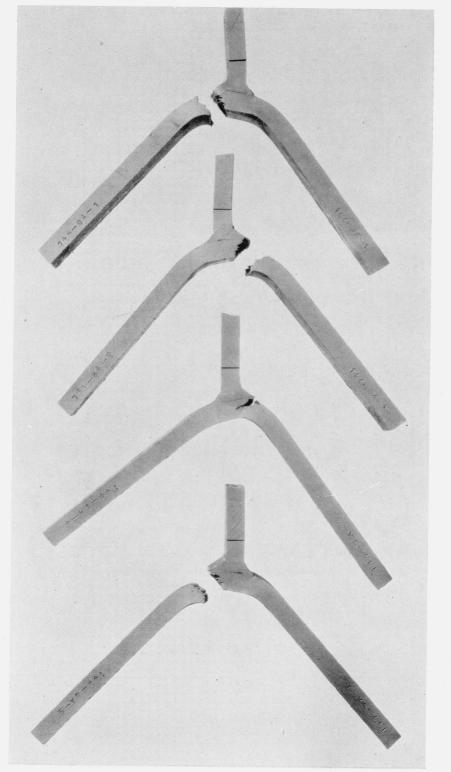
Steel 144, ½-in. plates, welded as rolled. Sharp fractures in the plate metals. Average angle at maximum load, 56°.
